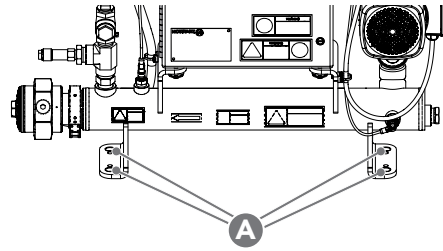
CMM/CLM 0.75 inch (19.05 mm) and .38 inch (9.65 mm) diameter mounting holes × 4 (A).
